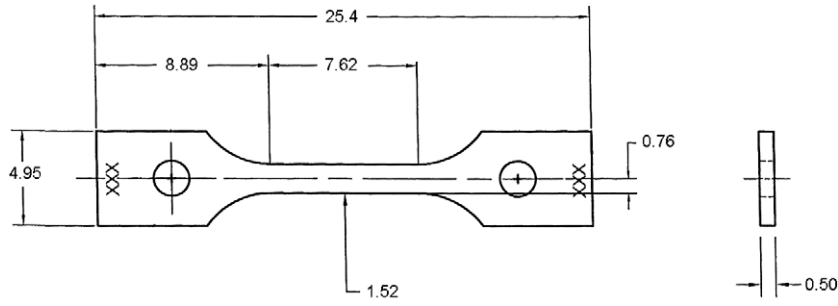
Schematic drawing of a type SS-3 sheet tensile specimen (unit: mm).
